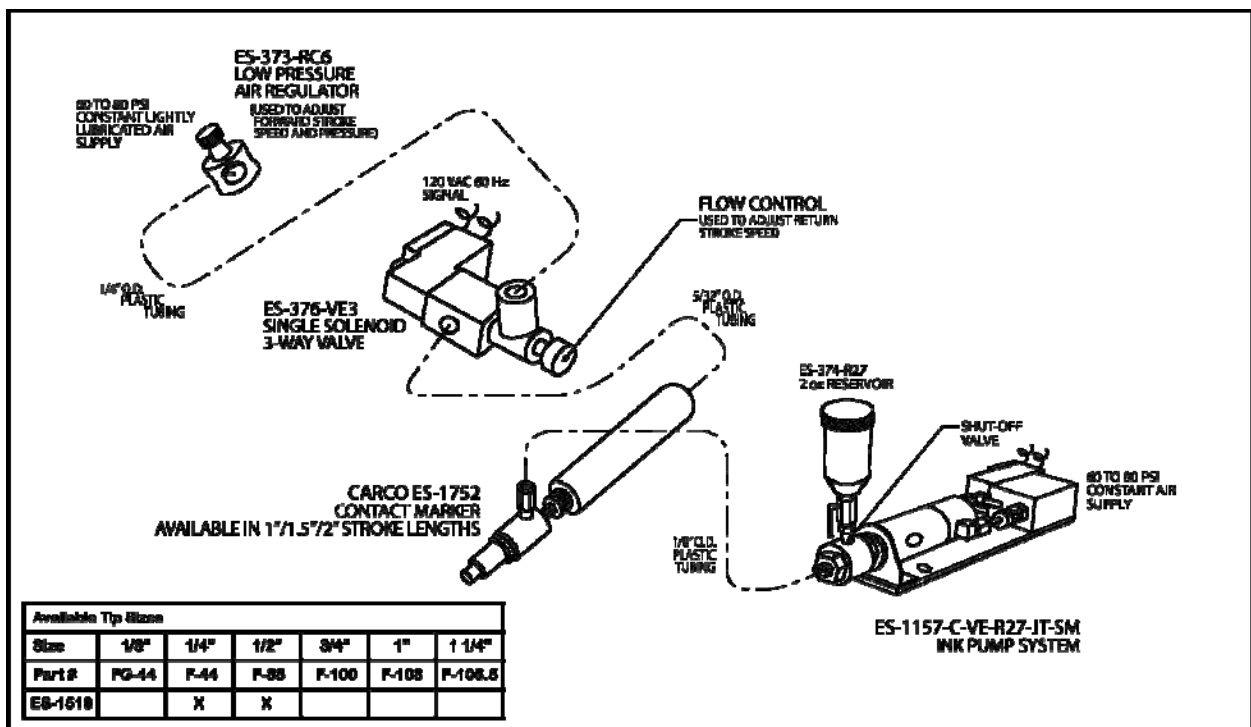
Carco ES-1752 Mini-Spring Contact Marker
